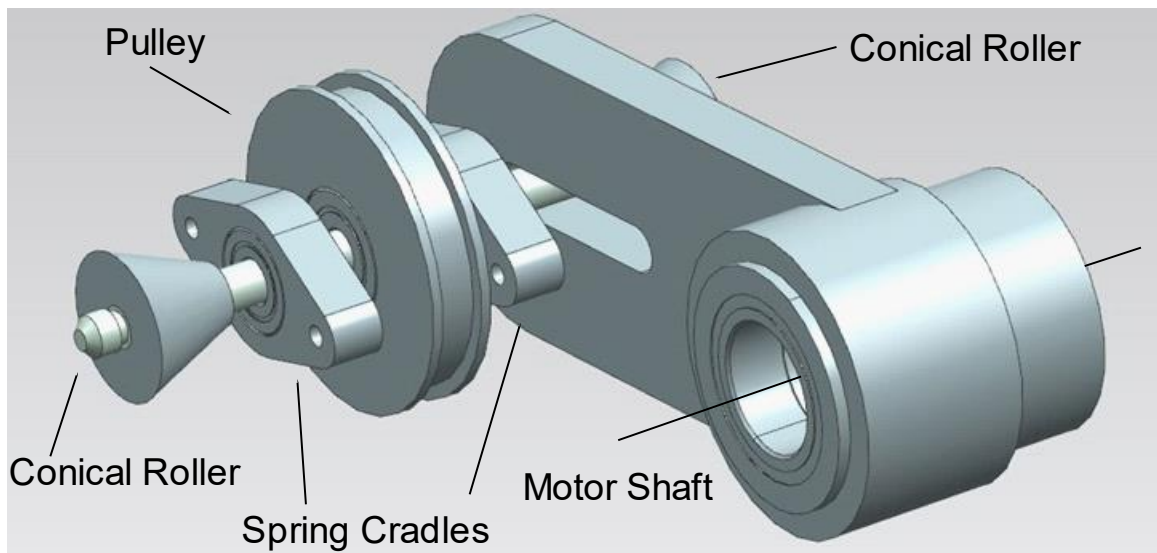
Slot Mechanism Lever Piece & Shaft Assembly
